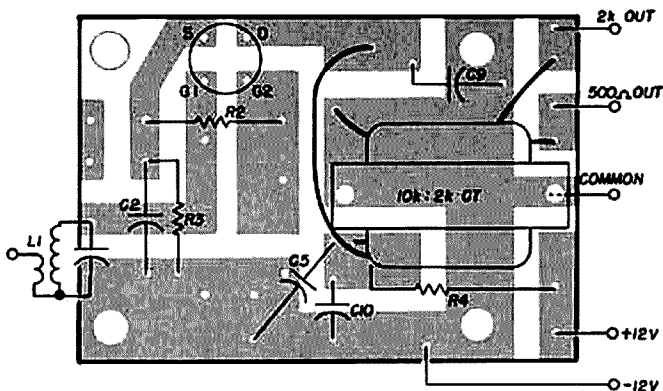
Method of mounting the product-detector output transformer on the universal printed-circuit board.
